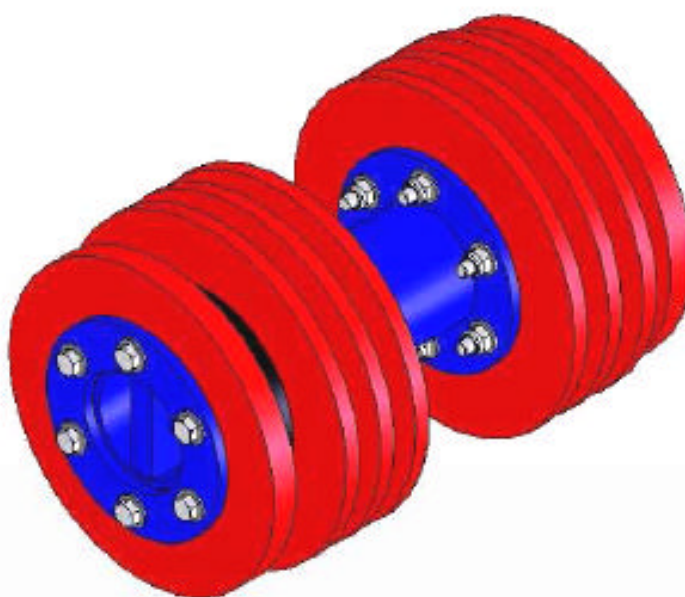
Typical Multi Bolt 2-4D Pigging Tool
